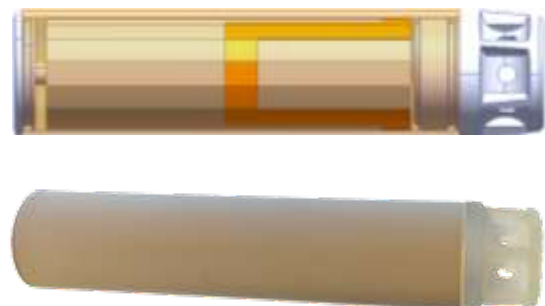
CAD design of bolus sensor (top) and fabricated bolus housing (bottom)
